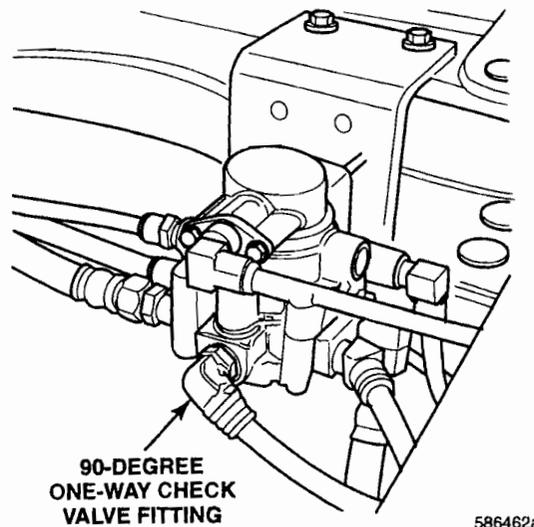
Bendix SR-7™ Spring Brake Modulating Relay Valve
